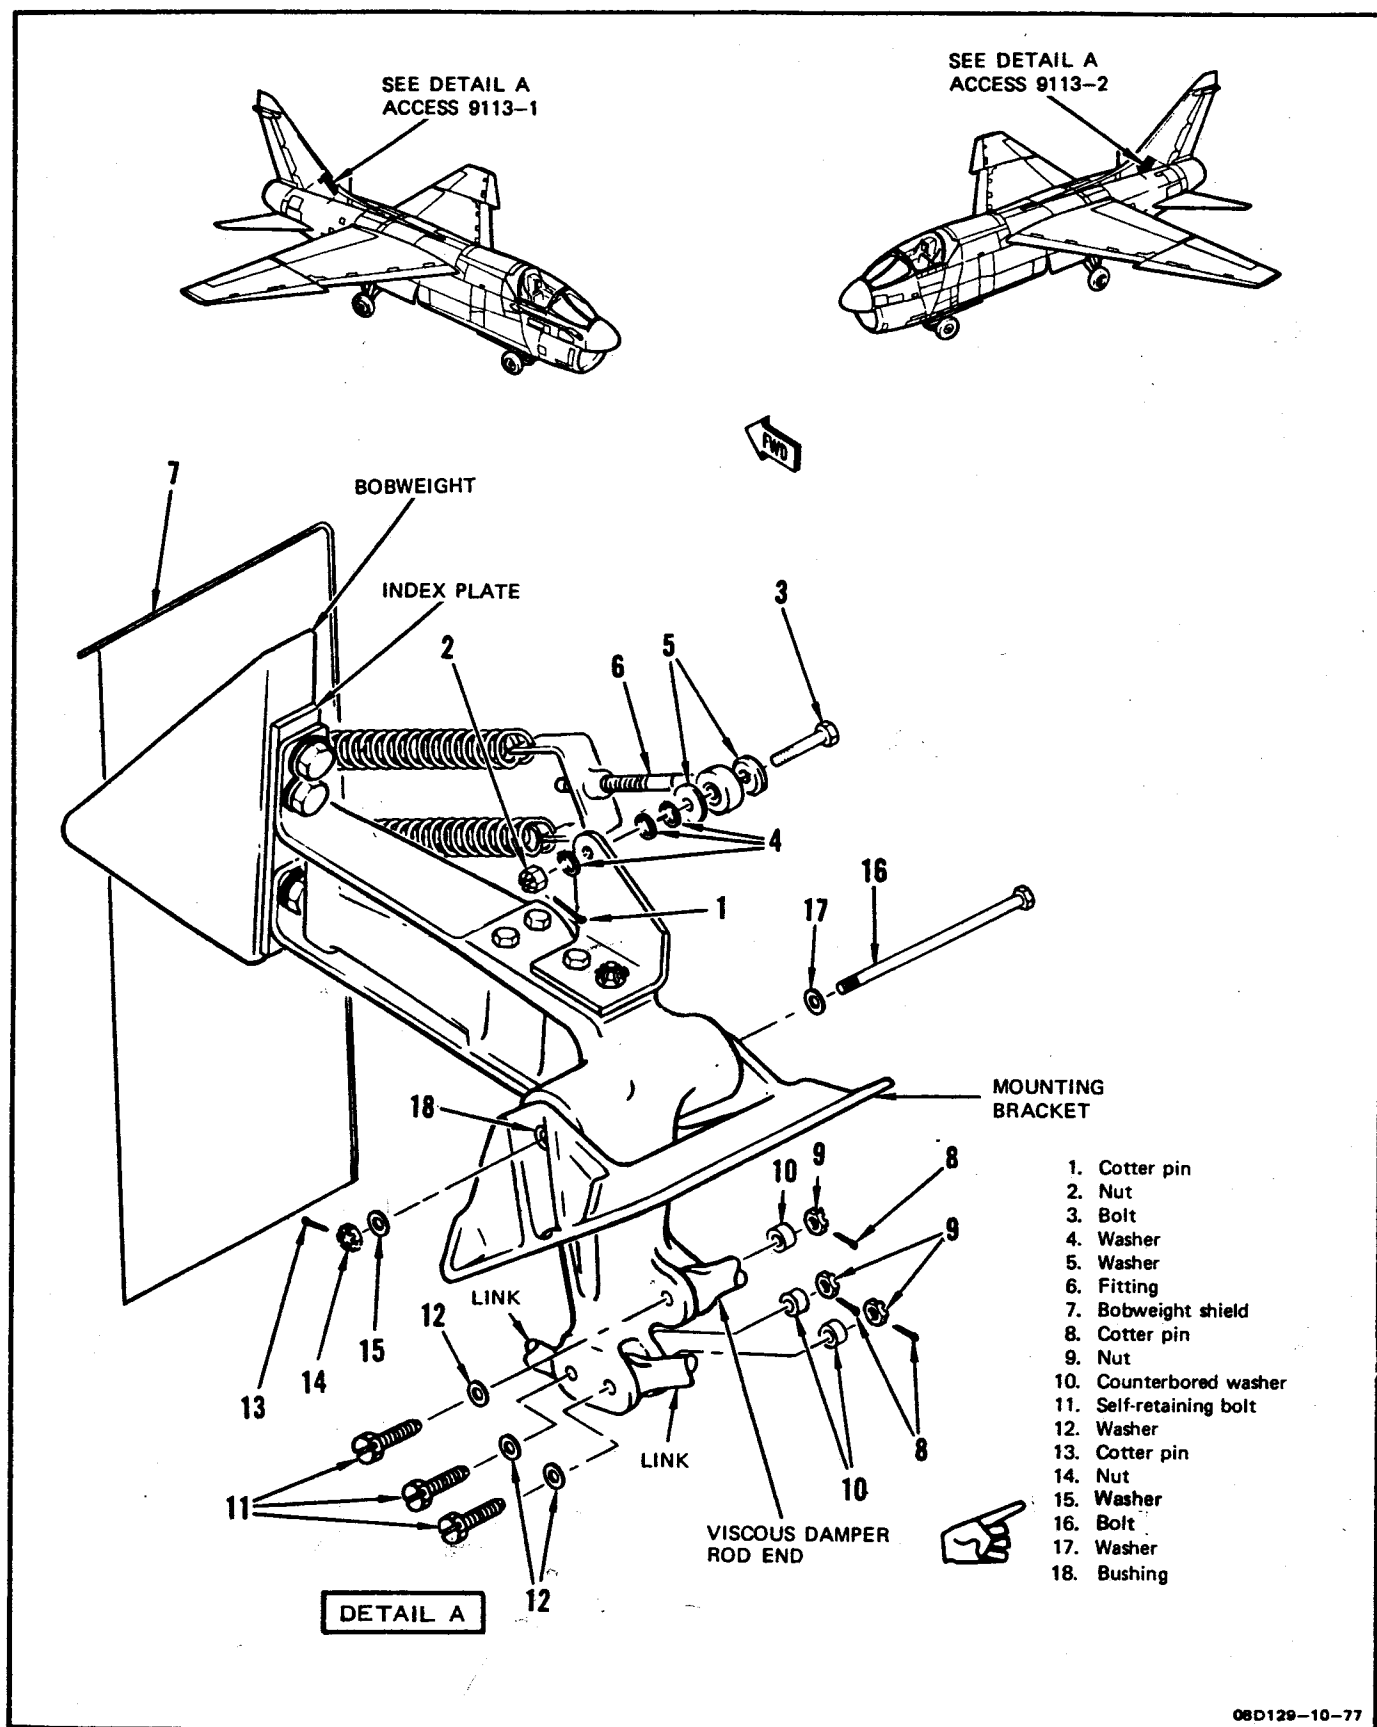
Aft Bobweight Assembly Removal and Installation
